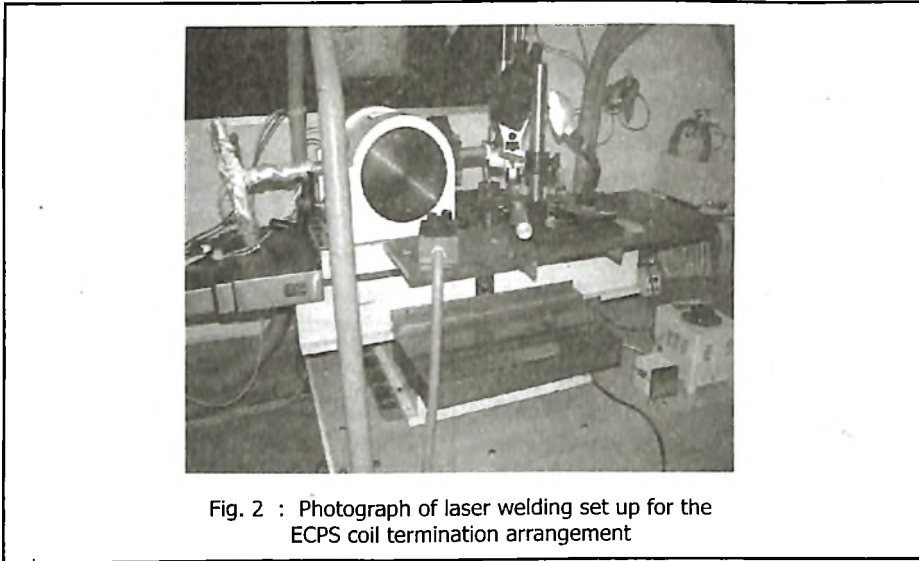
Photograph of laser welding set up for the ECPS coil termination arrangement
